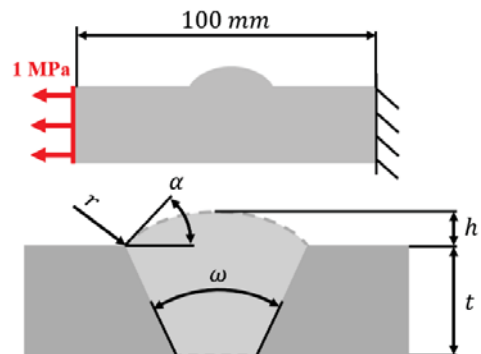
Loading condition and geometry parameters for the butt weld geometry.
